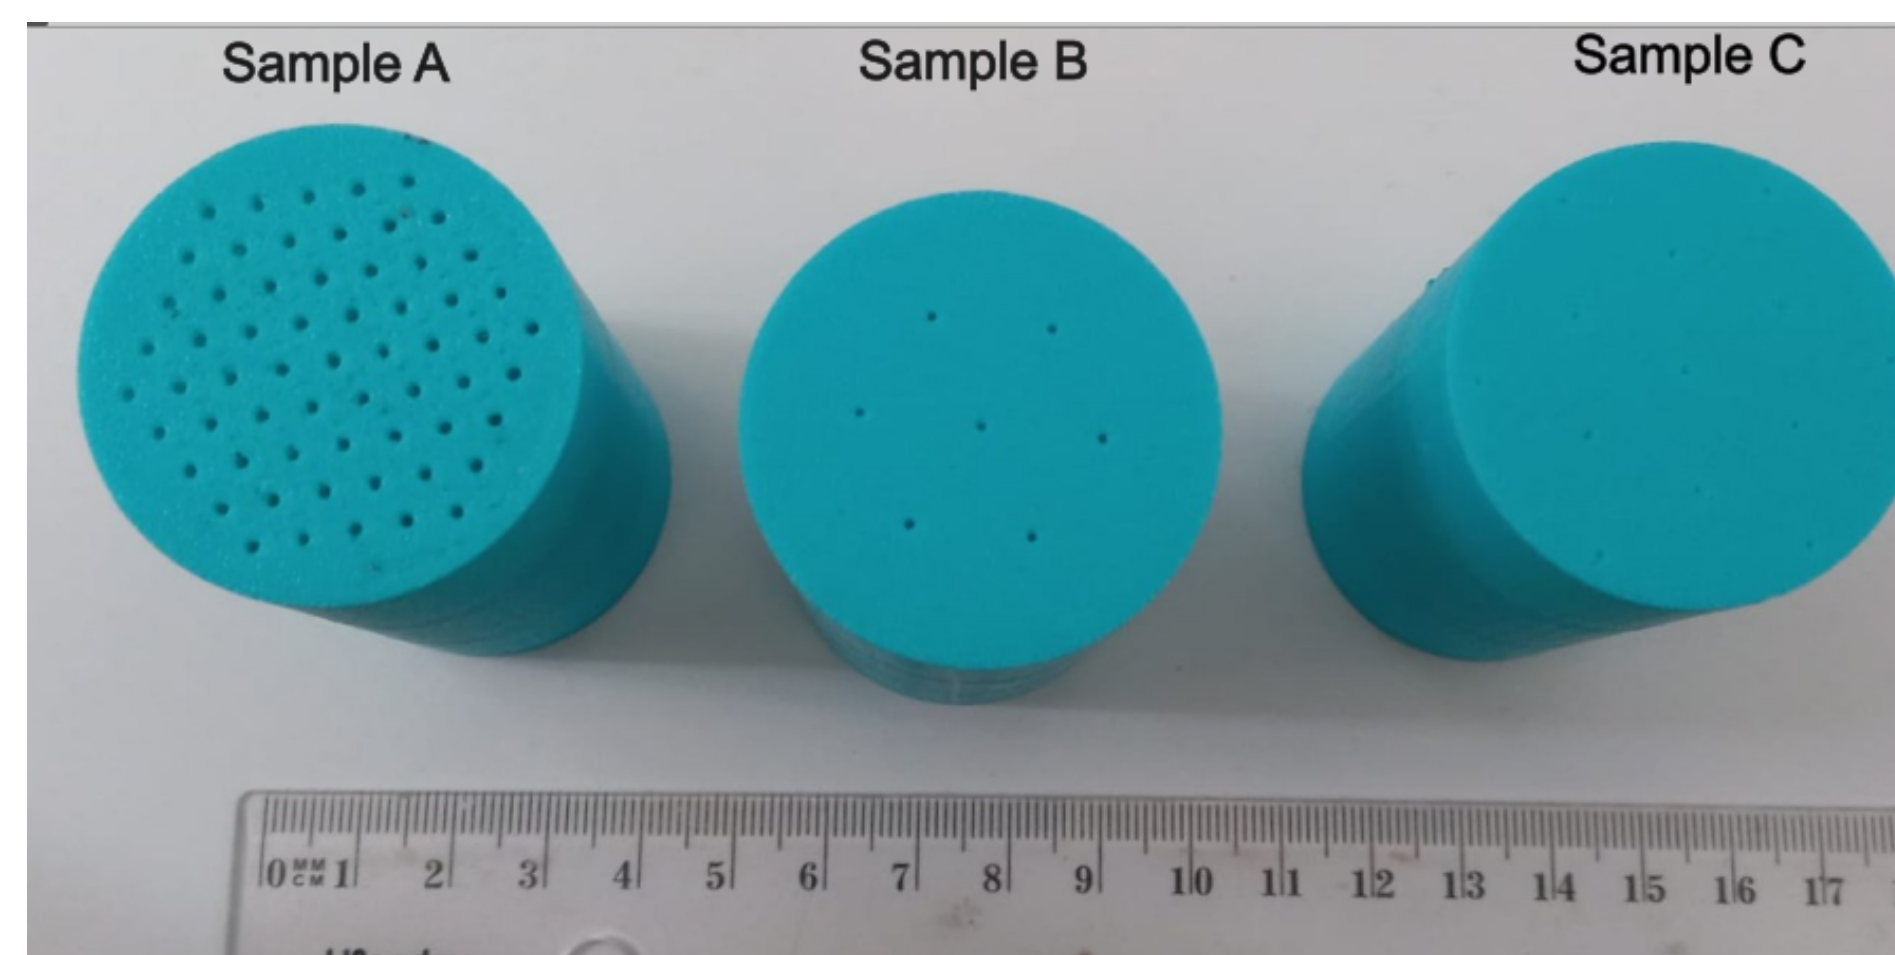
Multi-layer MPP specimens: FDM-printed PLA samples (sample A to C from left to right).
